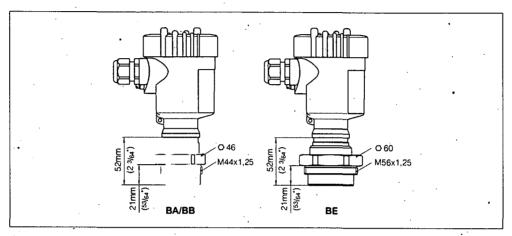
VEGABAR 64, threaded fitting for paper industry: BA/BB = M44x1.25, BE = M 56x1.25
